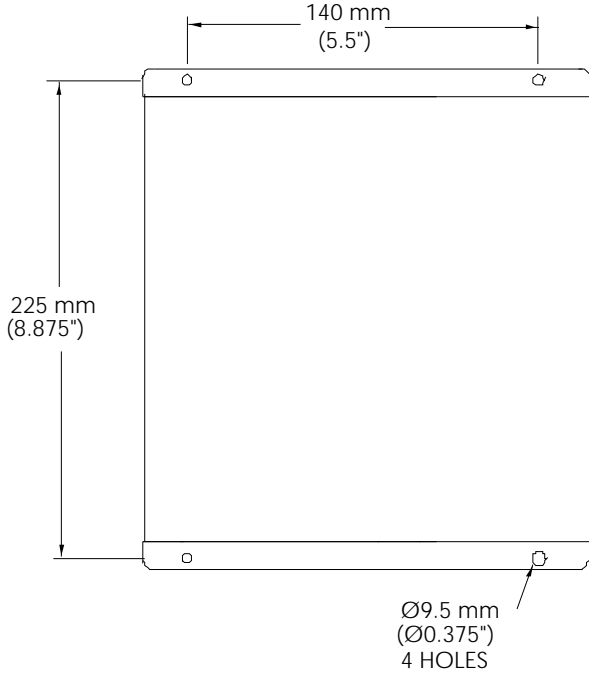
Location of Mounting Holes for AMC-1DMB-RL
